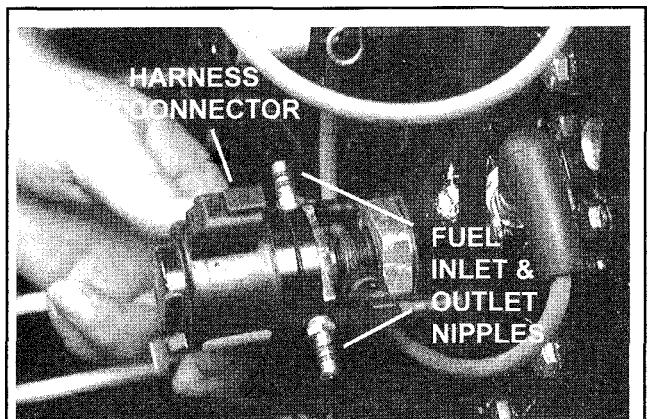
One fuel injector is mounted to each cylinder—1501175 hp motors with fuel rails shown (others similar, but are equipped with internal fittings instead of external fuel nipples)
